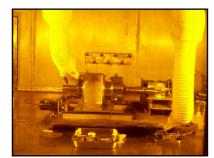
Cutting and dismantling 03M-06U by a capsule cutting machine in the M2 Hot cell
